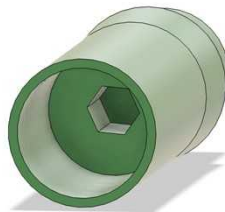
Motorized Roller Coupler Hole (Lift Mechanism)
